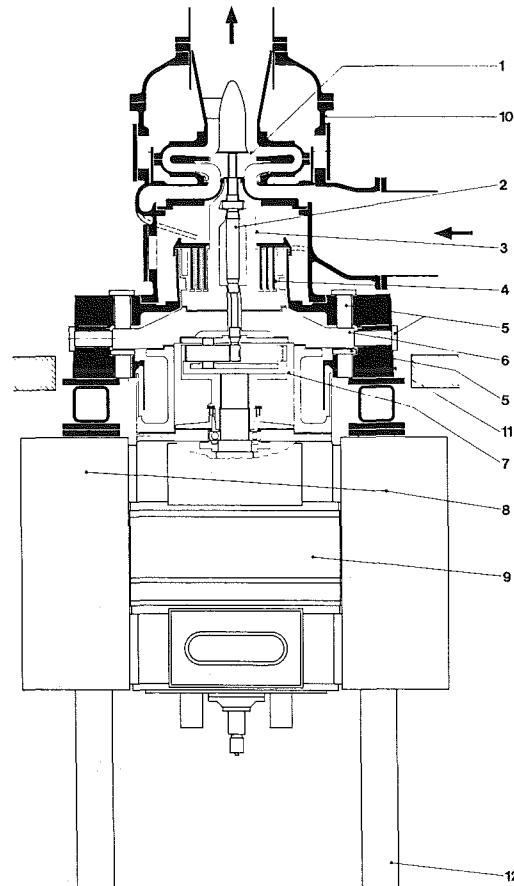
Test stand TICINO: (1) impeller; (2) high speed shaft; (3) bearing case of high speed shaft; (4) mercury seal; (5) upper, radial and lower hydrostatic bearing; (6) pendulum base plate; (7) planetary gear; (8) motor coolers; (9) direct current motor; (10) compressor casing; (11) base frame; (12) pillars
